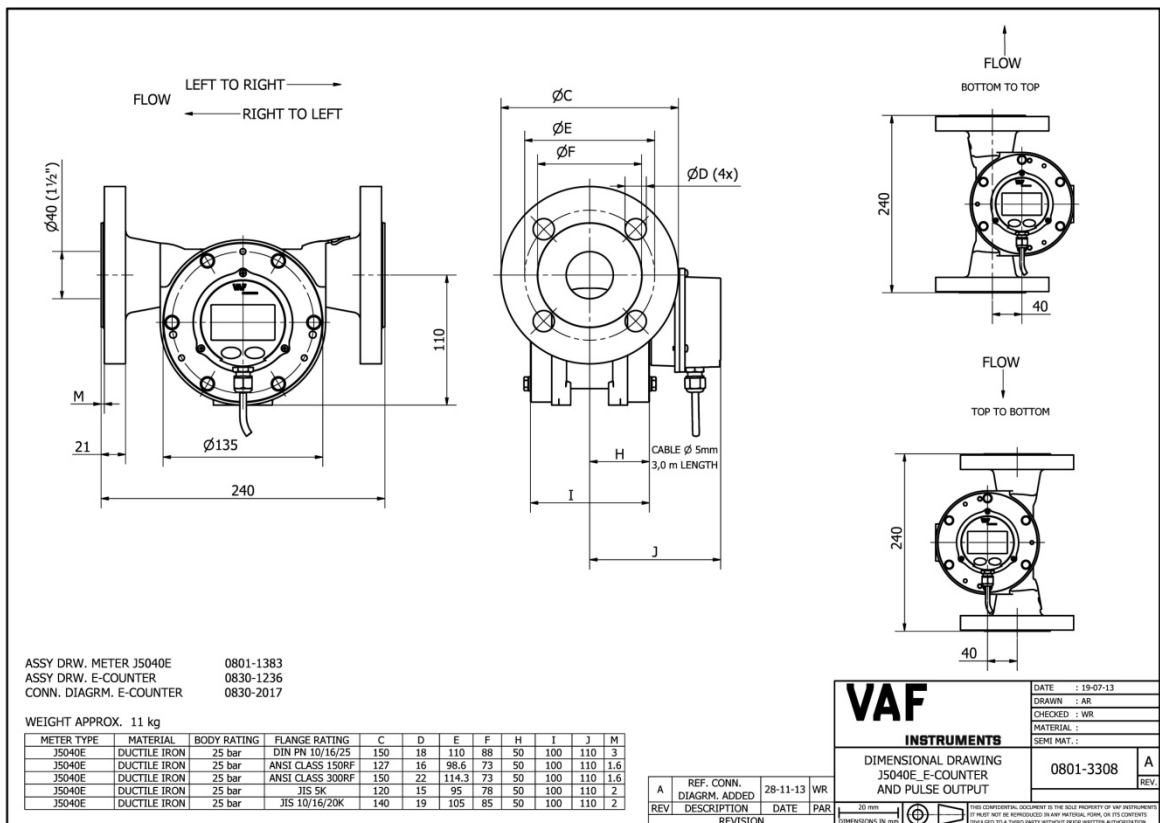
Drawing 0801-3308 – Dimensional drawing J5040E E-counter with pulse output
